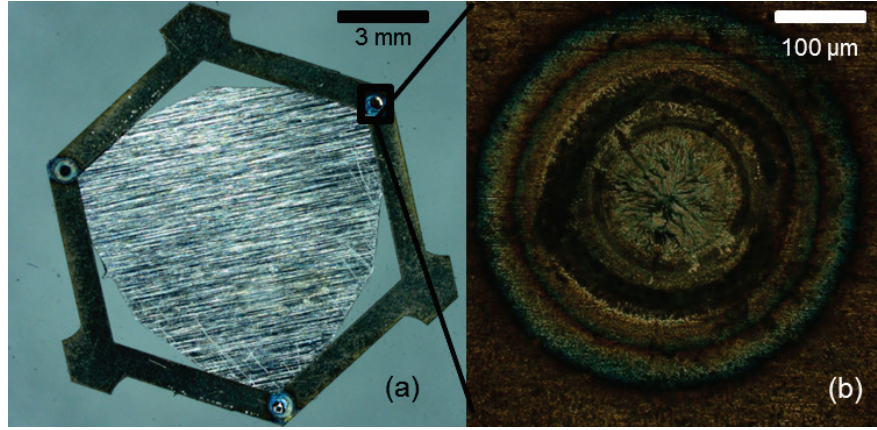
(a) Fabricated low CTE sample comprised of an Al inner plate and a Ti outer frame. (b) Laser-welded interface between the sample's Al and Ti part.
